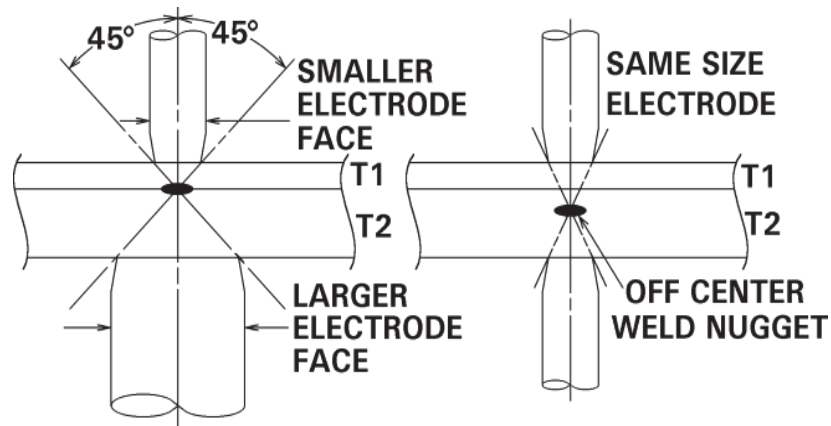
Electrode Sizing for Dissimilar Thickness (www.resistanceweldsupplies.com, 2016)
